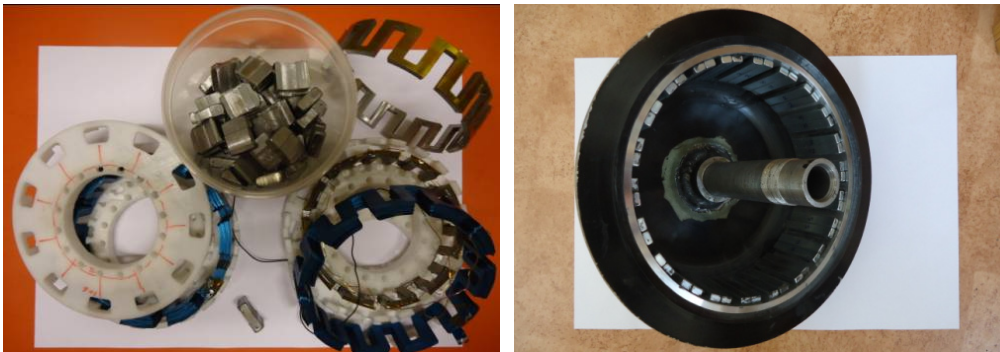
Stator parts (left) and assembled rotor (right)(17-JUN-2013)
